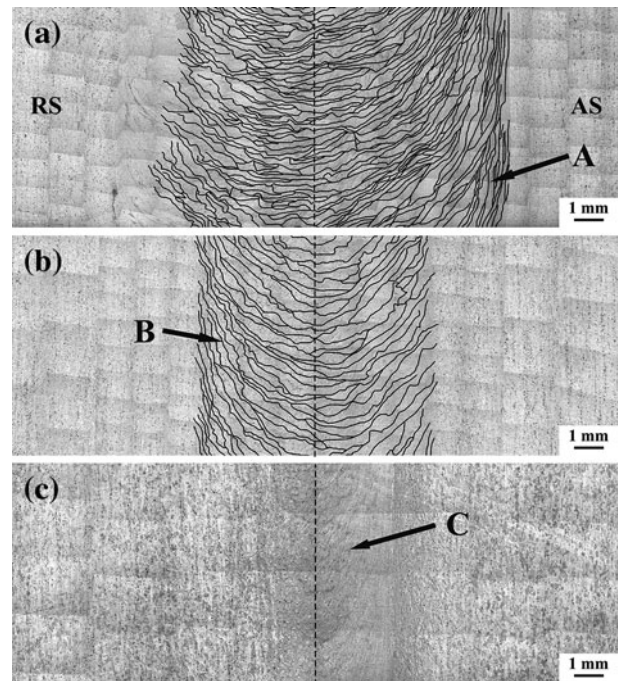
Segregation bands patterns on horizontal cross section of (a) sample H-800-100, (b) sample M-800-200, and (c) sample L-800-400 (the AS is on the right). The vertical dashed line represents the weld centerline before welding.
